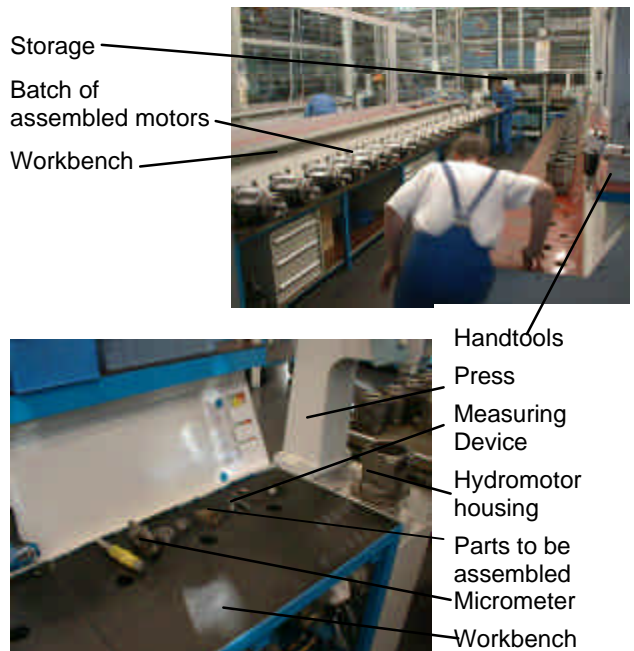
Initial Scenario of *rob@work* at a workbench with a batch of assembled hydraulic motors (Courtesy Bosch Rexroth Mobile Hydraulics).
